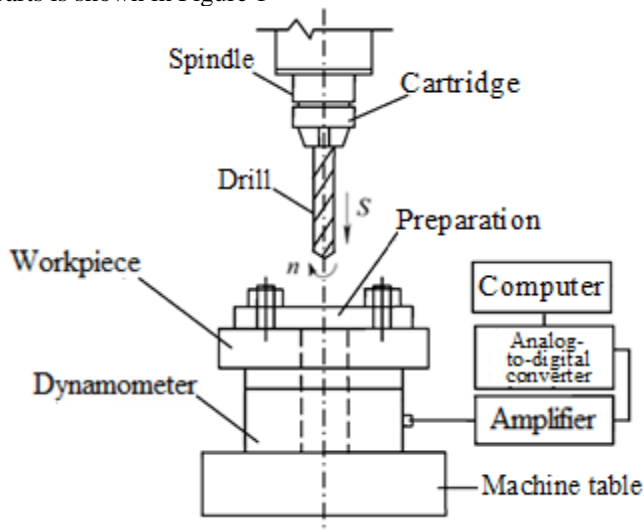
Scheme of the experimental machine for studying the drilling process of carbon fiber parts
